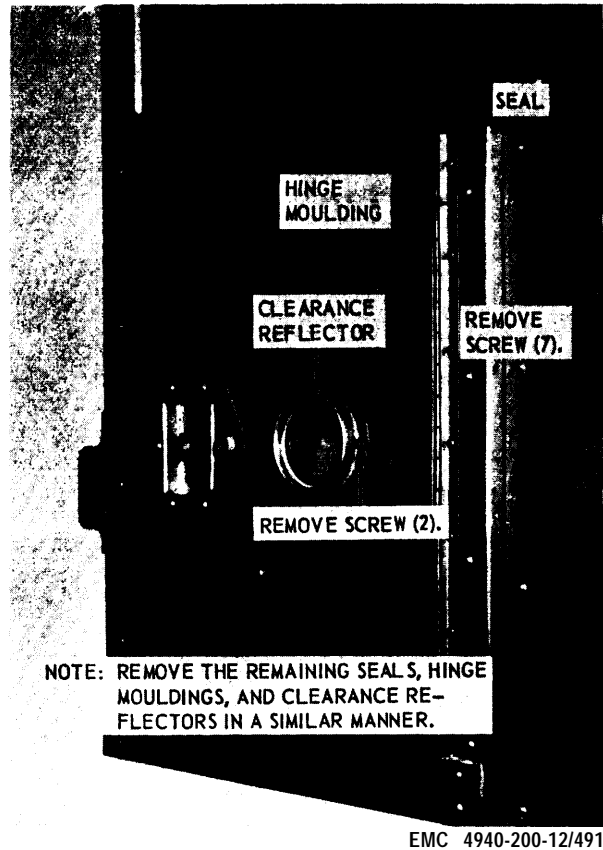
Hinge moulding, seal, and clearance reflector, removal and installation.
